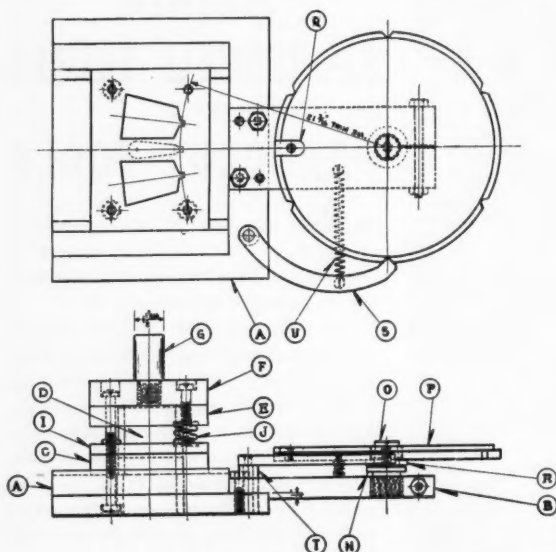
Illustrating the complete assembly of the double slot die and the indexing attachment used in conjunction with it, bolted in place on the die shoe.
